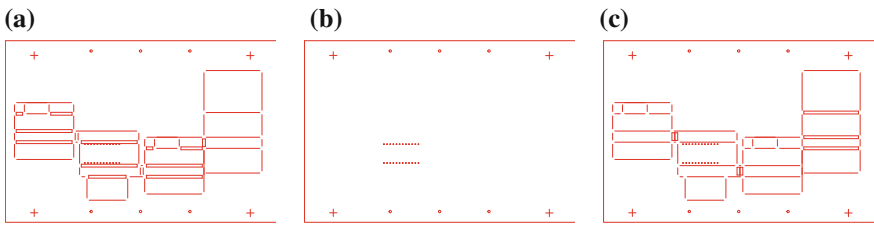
A three layer laminate can be assembled to form a self-folding structure that forms the designed geometry under uniform heating. a Top cardboard. b Shape-memory polymer. c Bottom cardboard
